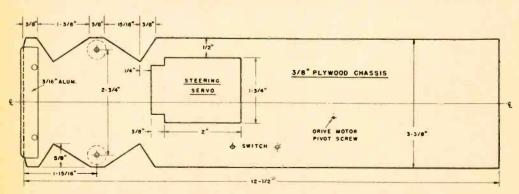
For a Sportsman truck, cut a chassis out of %-inch plywood to these dimensions. Rear wheels and axle are not altered. Front of truck is removed and new steering assembly built on this chassis.
